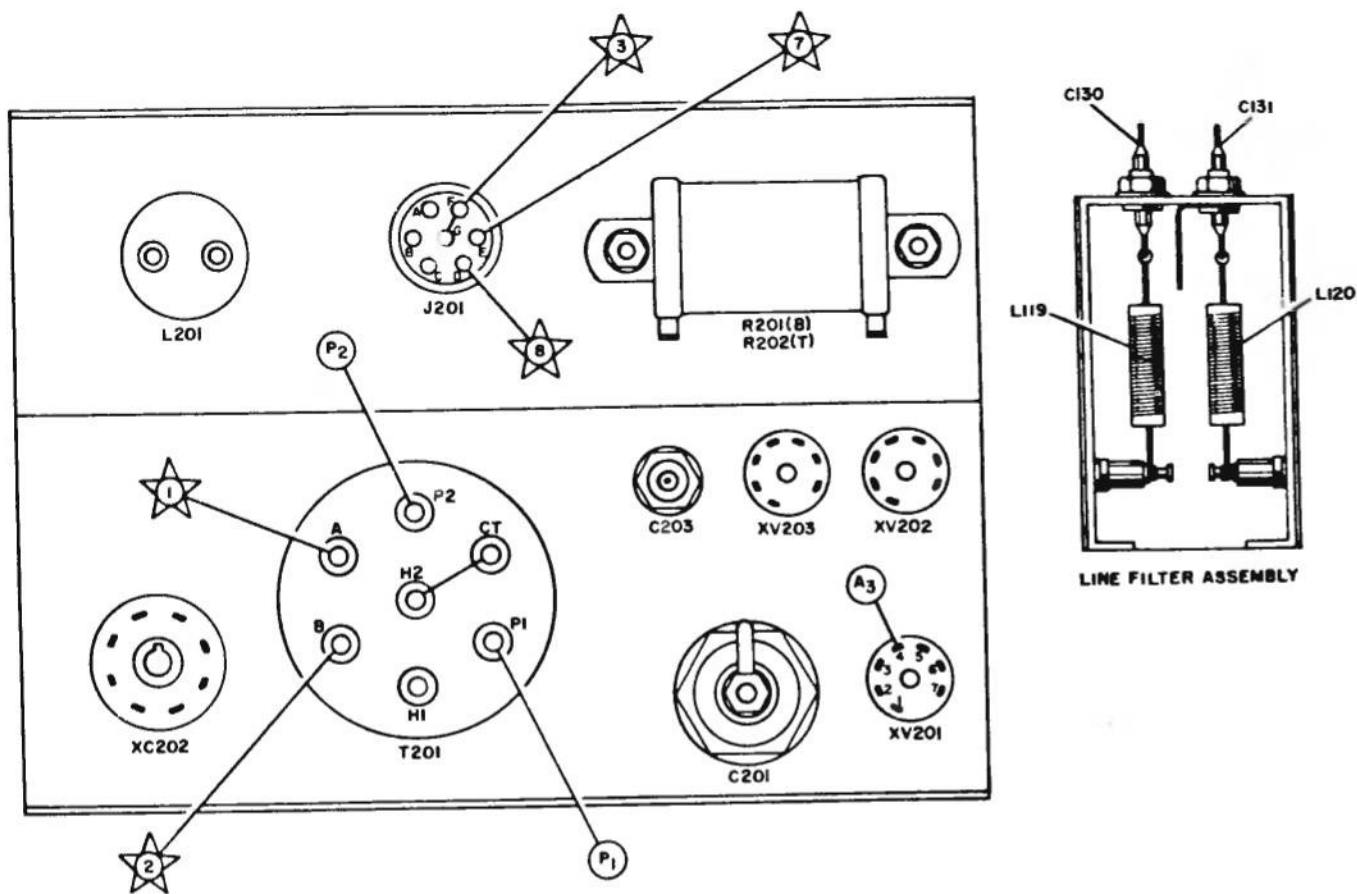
Power Supply PP-1215/URM-26B with chassis Folded Flat and Line Filter Assembly.
